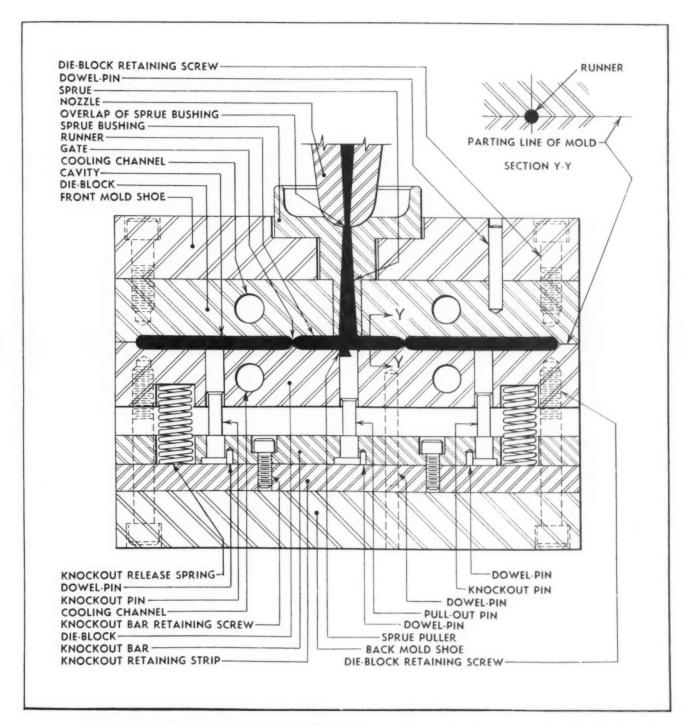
Section of Injection-molding Unit Showing Preferred Construction of Mold Details
